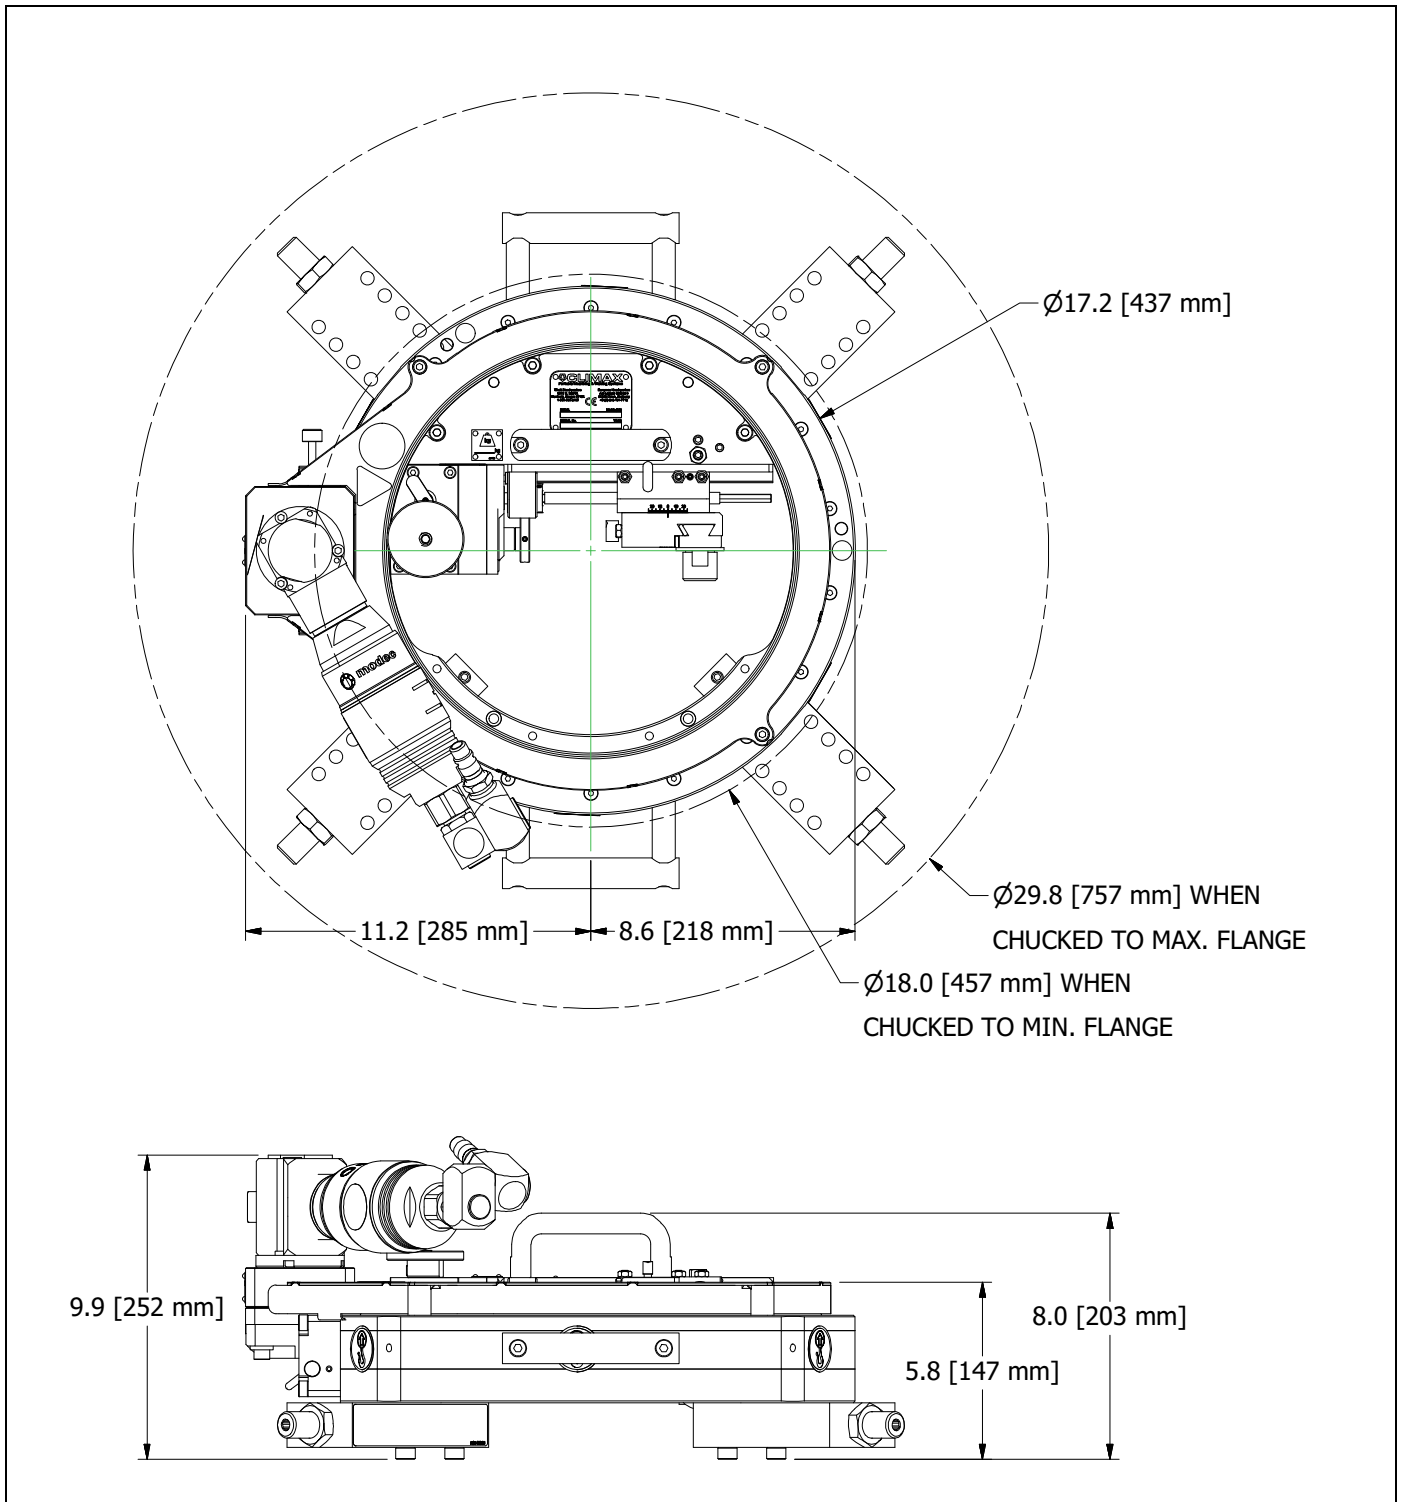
FF1200 MACHINE DIMENSIONS
